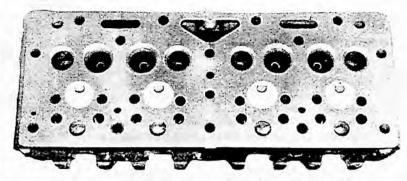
SHOWING SWIRL CHAMBERS POSITIONED IN COMBUSTION HEAD
